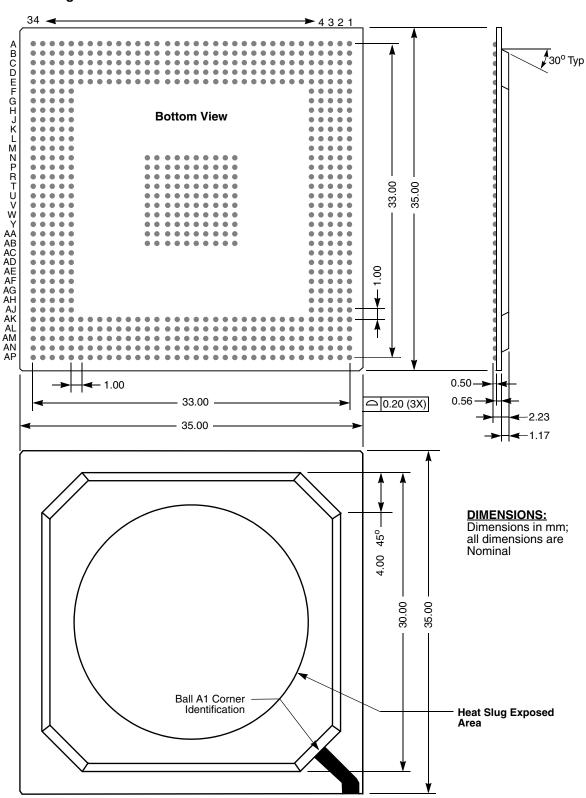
PEX 8524VAA/BB/BC 680-Ball PBGA Mechanical Dimensions
